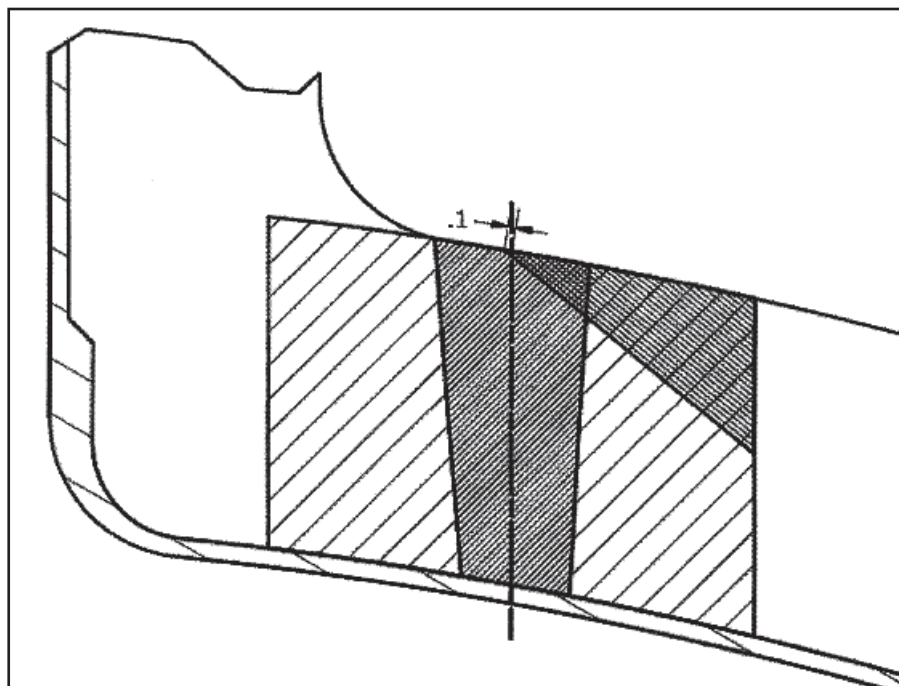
Weld WP-12, 60° Nozzle Side Axial Scans
